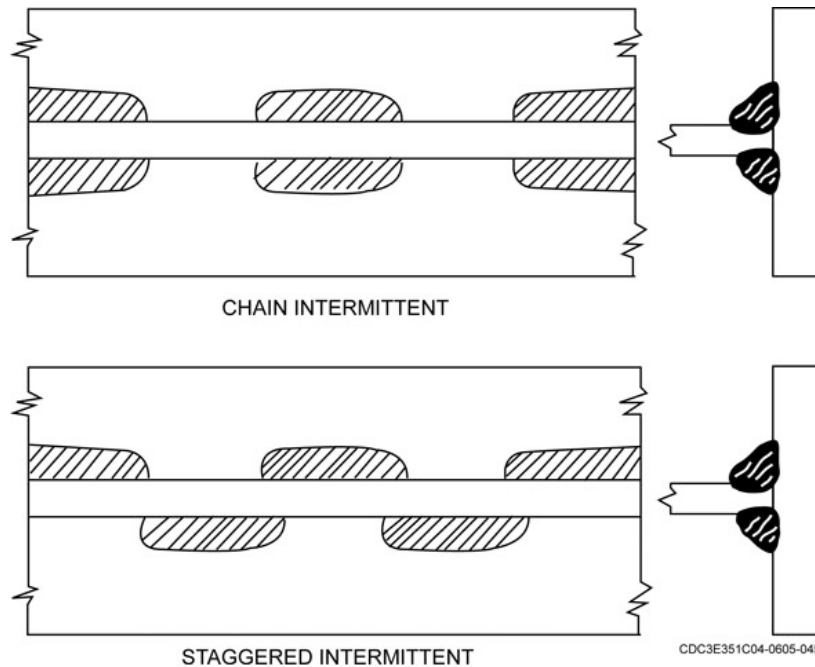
Intermittent fillet welds (horizontal position).
